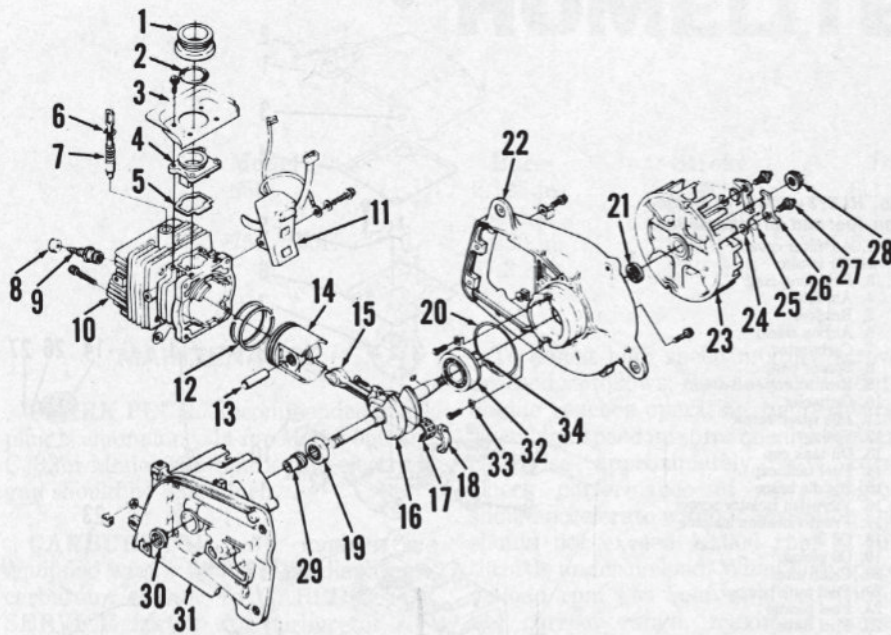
Exploded view of Model 750 and 750E engine. Model 650 is similar except second roller bearing (19) is used in place of components (32, 33 and 34).
